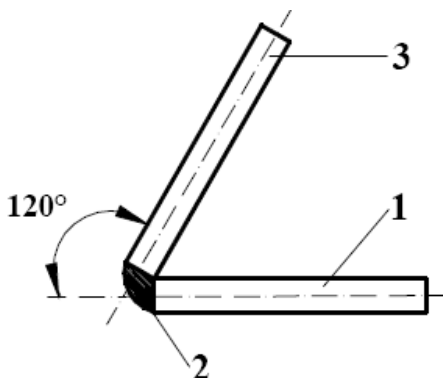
Diagram of testing the welding models: 1, 3 - base-metal, 2 - the weld
